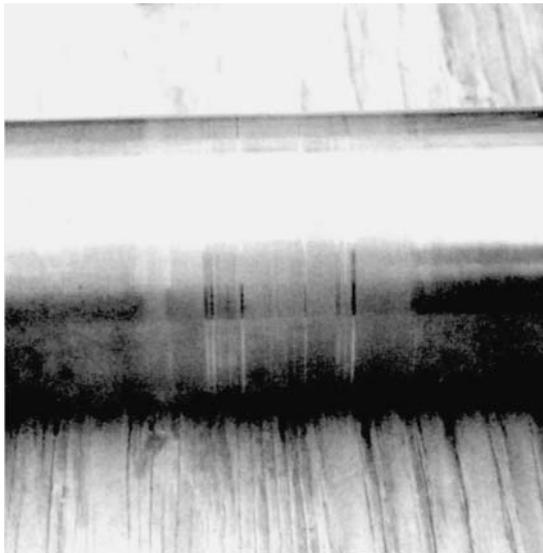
Pinion Shaft Prior to Total Failure, Showing Spark Tracks in the Bearing Journal Location.
